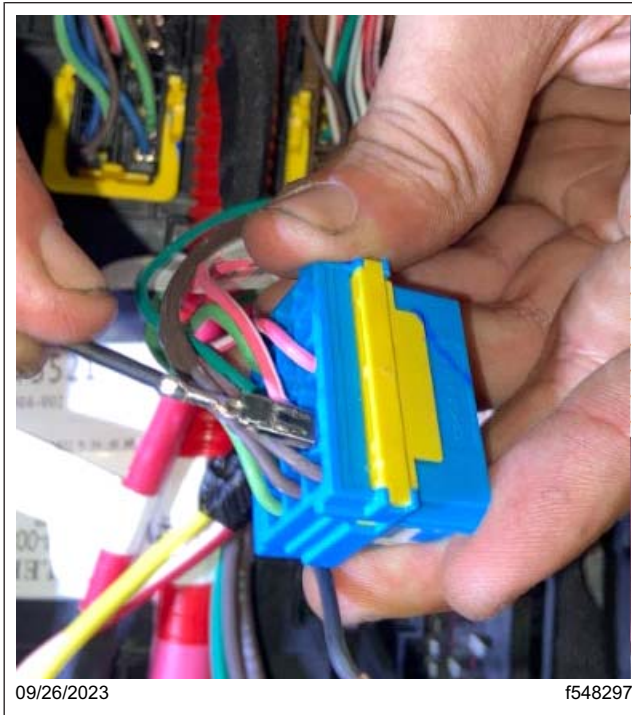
, Removing the Wire Using Two-Prong Pin Removal Tool
